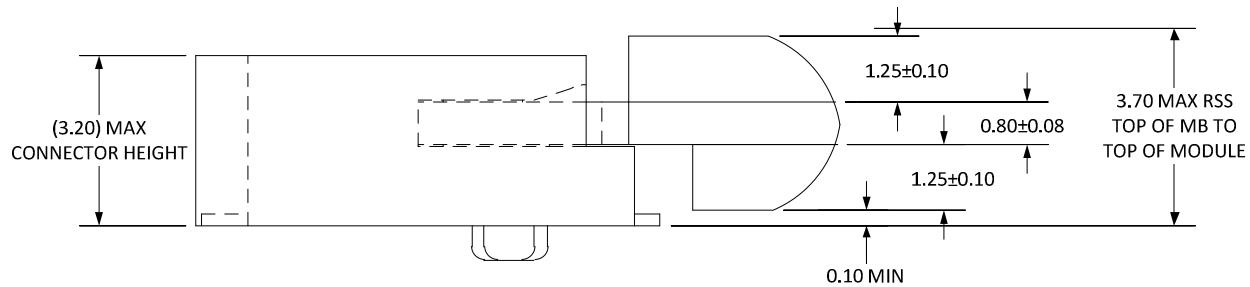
H3.2-D2 - Stack-up Top Mount Double-sided Module for 1.35 Maximum Top-side Component Height
